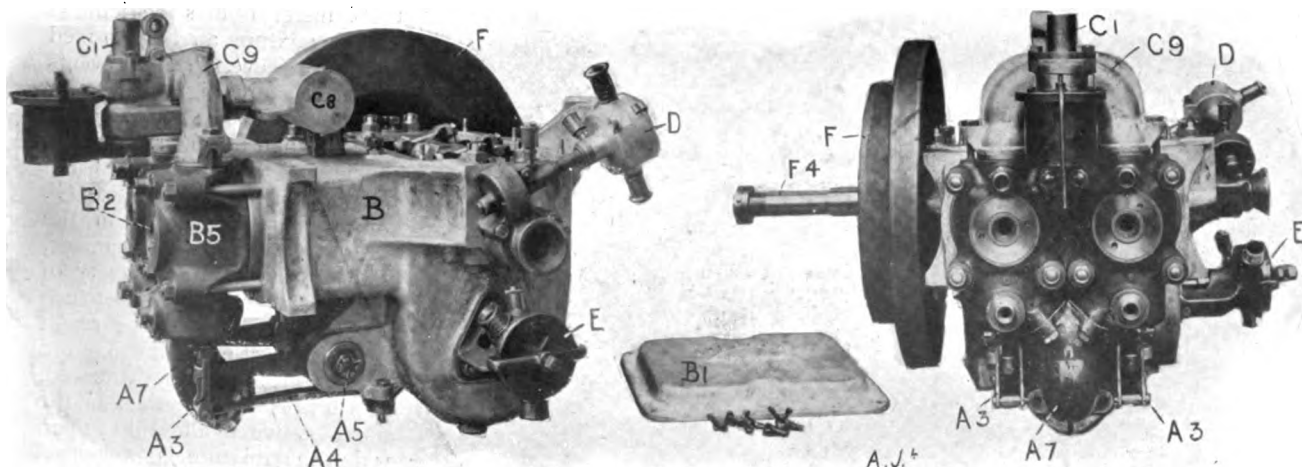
Two views of the 8-h.p. Wolseley Engine, complete with its Carburettor, Commutator and Circulating-Pump.
